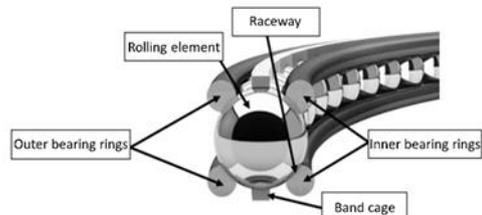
Construction of a wire race bearing of the company Franke [11]
